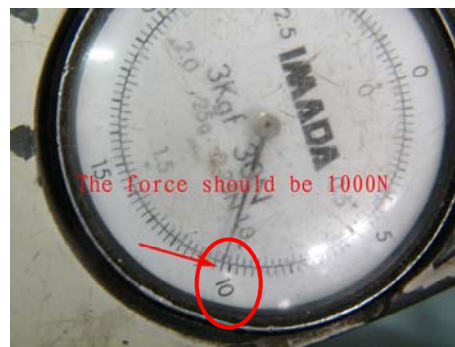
Measuring Belt Tension using Pull Test Gaug
